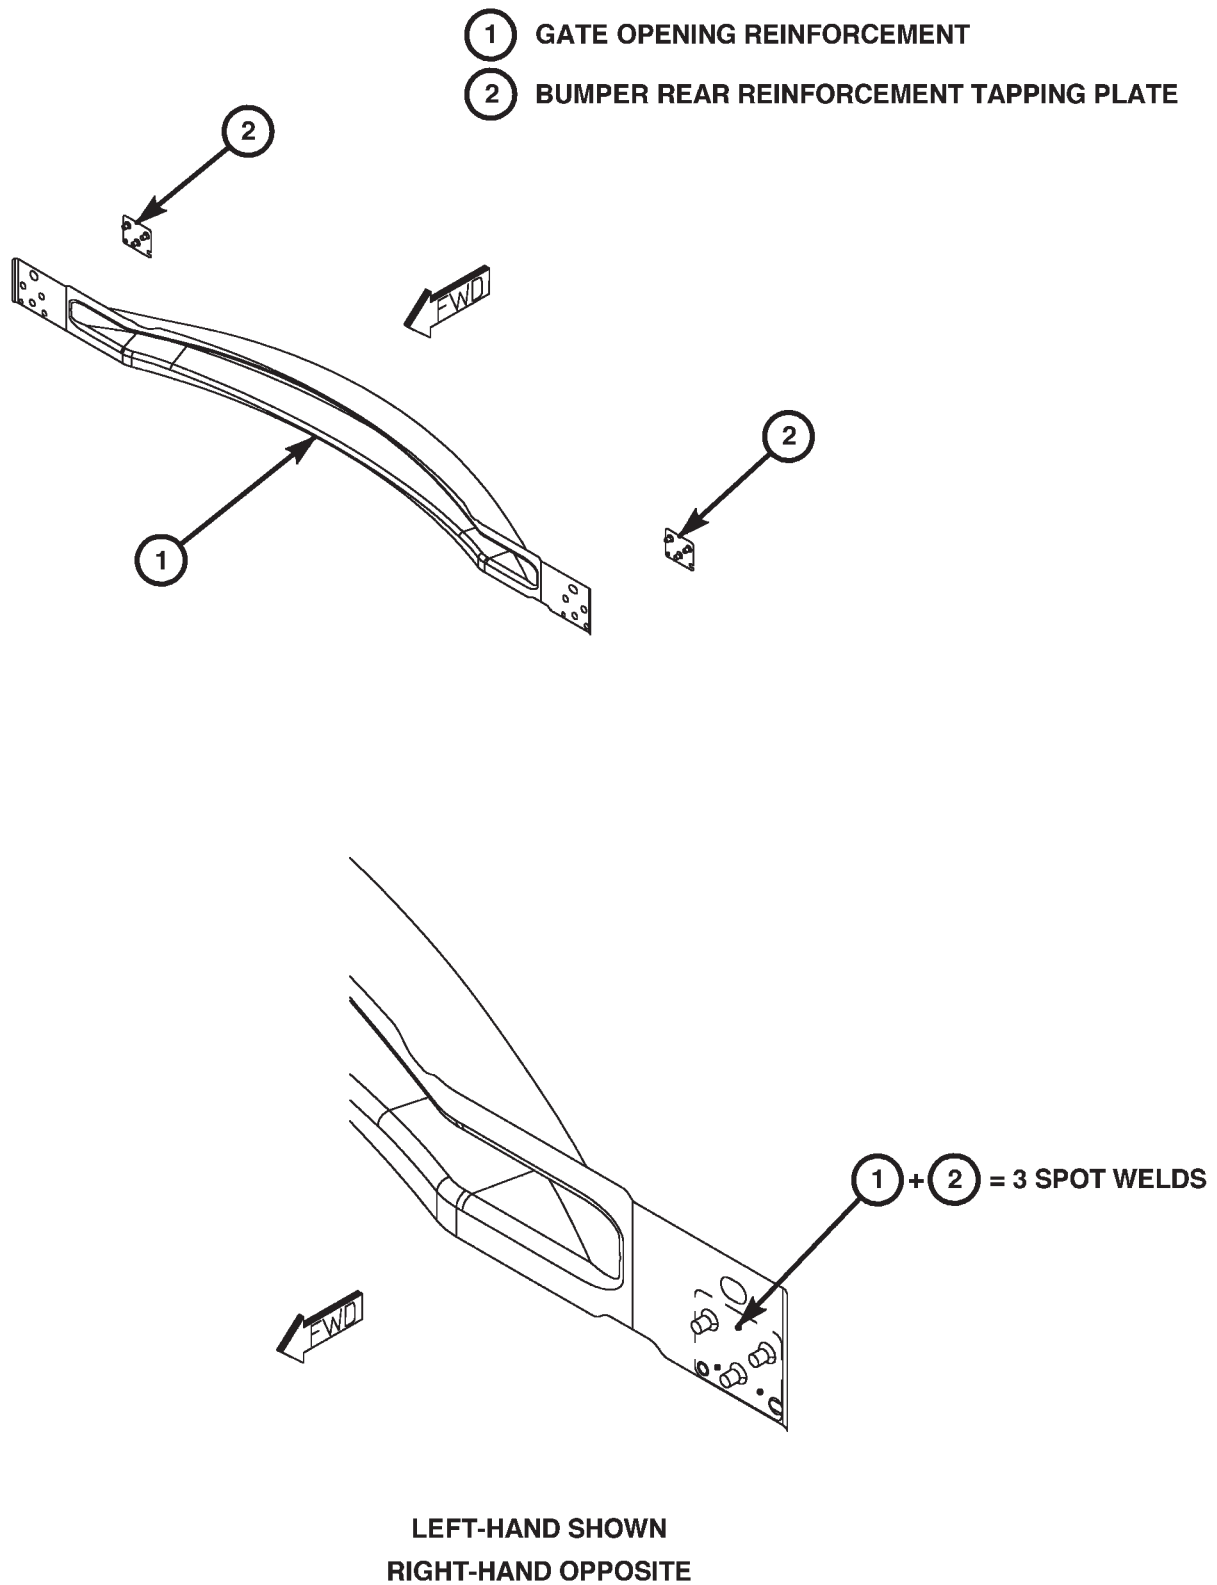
BUMPER AND SWING GATE REINFORCEMENT
